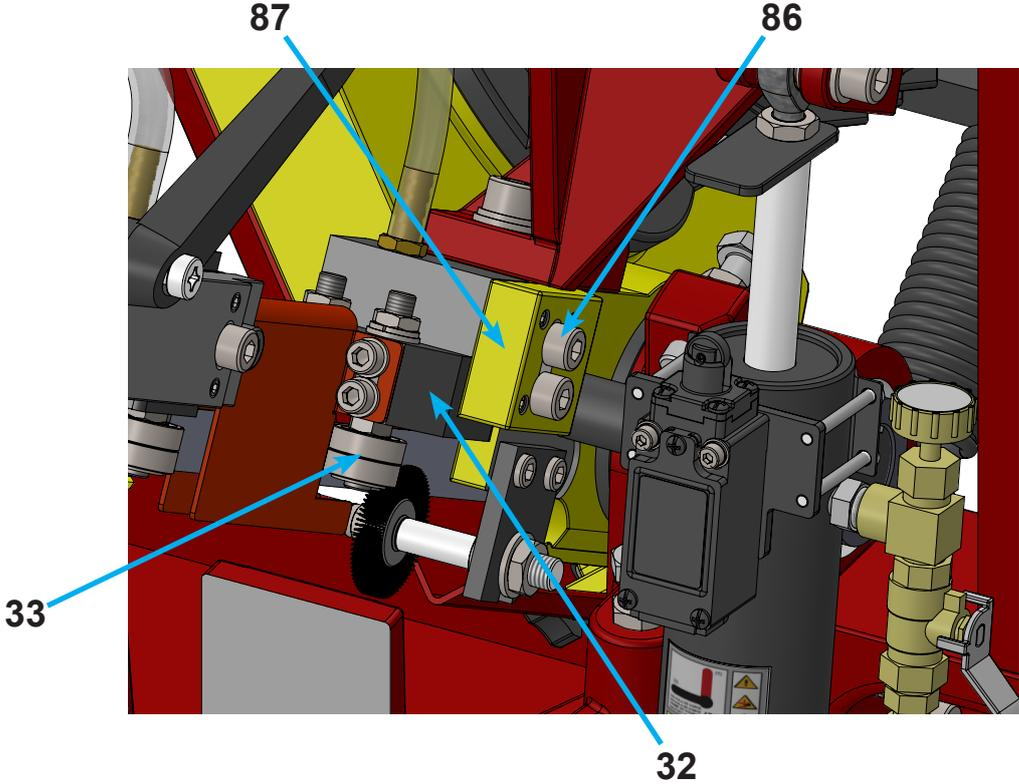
BACK BEARING ADJUSTMENT – FIXED GUIDE
